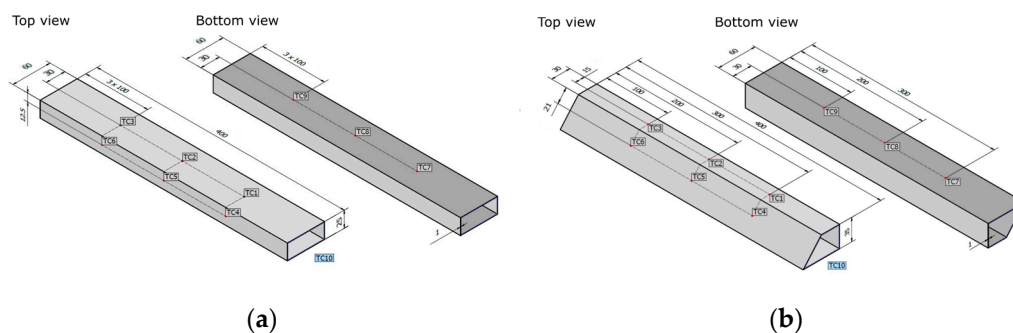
Geometry of the workpieces: (a) rectangular; (b) angled.
